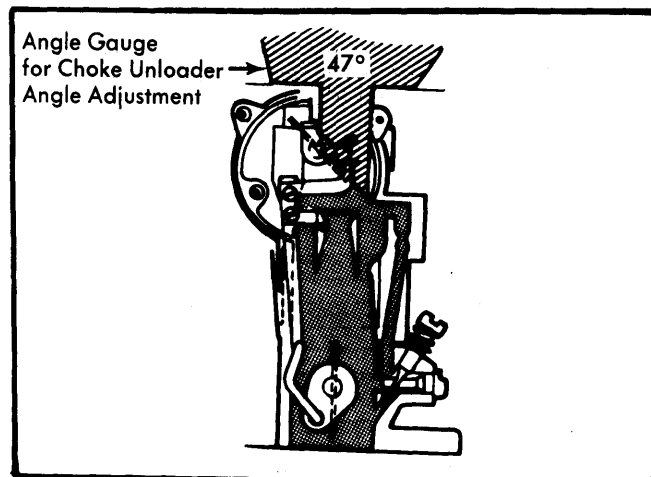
Adjusting Choke Unloader Angle with Gauge
